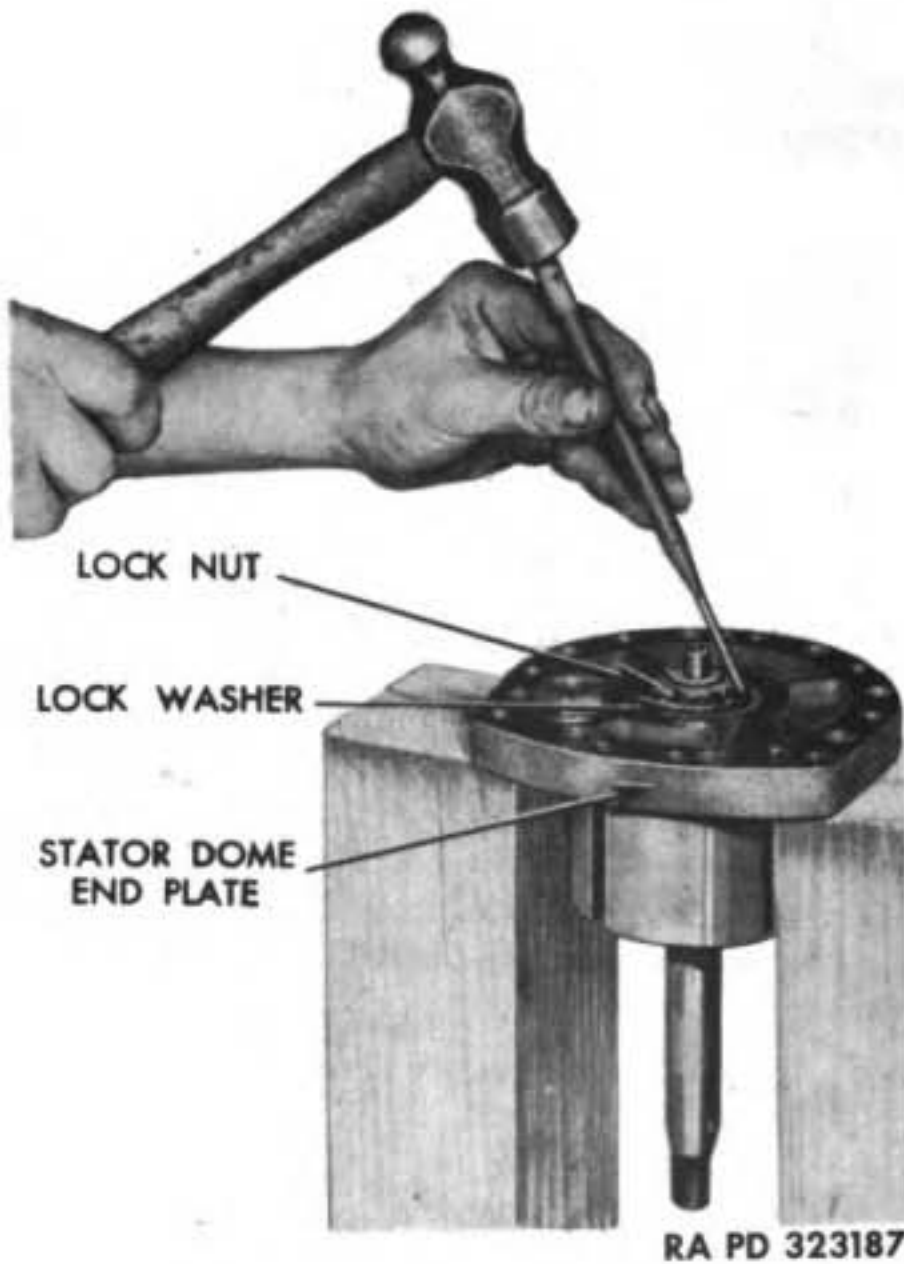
Releasing Lock Washer from Ball Bearing Lock Nut
